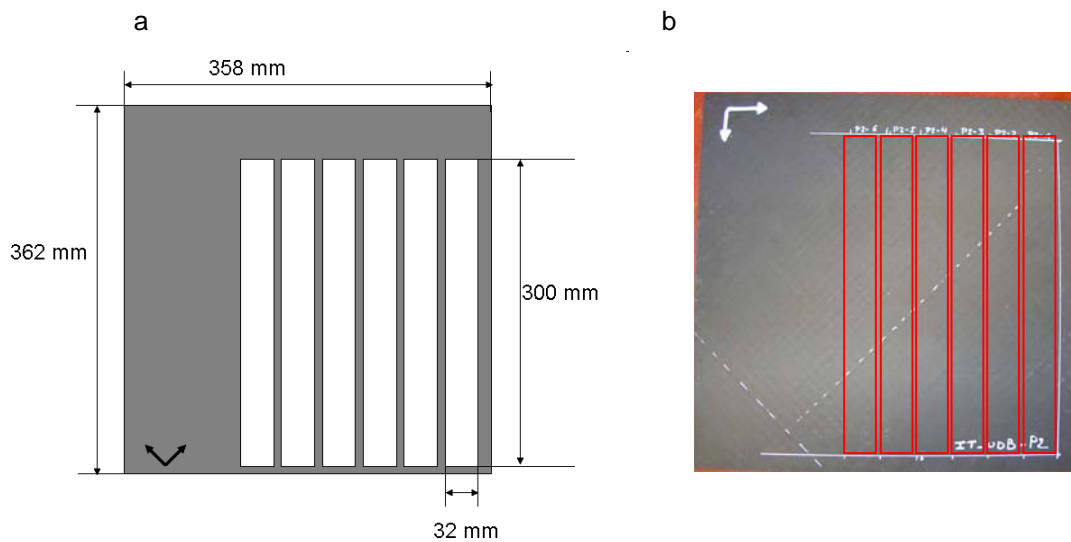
Cutting plan plate 2; model (a), photo of the laminate with schematic drawing of the cut outs (b)
